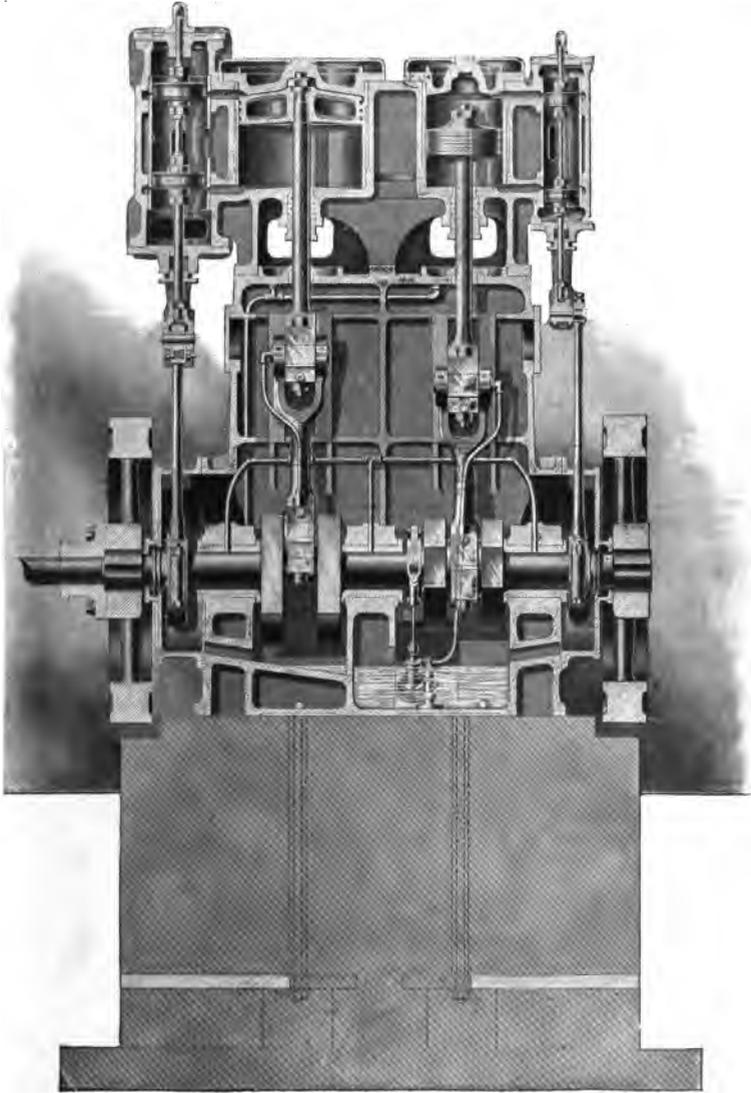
SECTIONAL VIEW OF "B.I." QUICK SPEED ENGINE.
